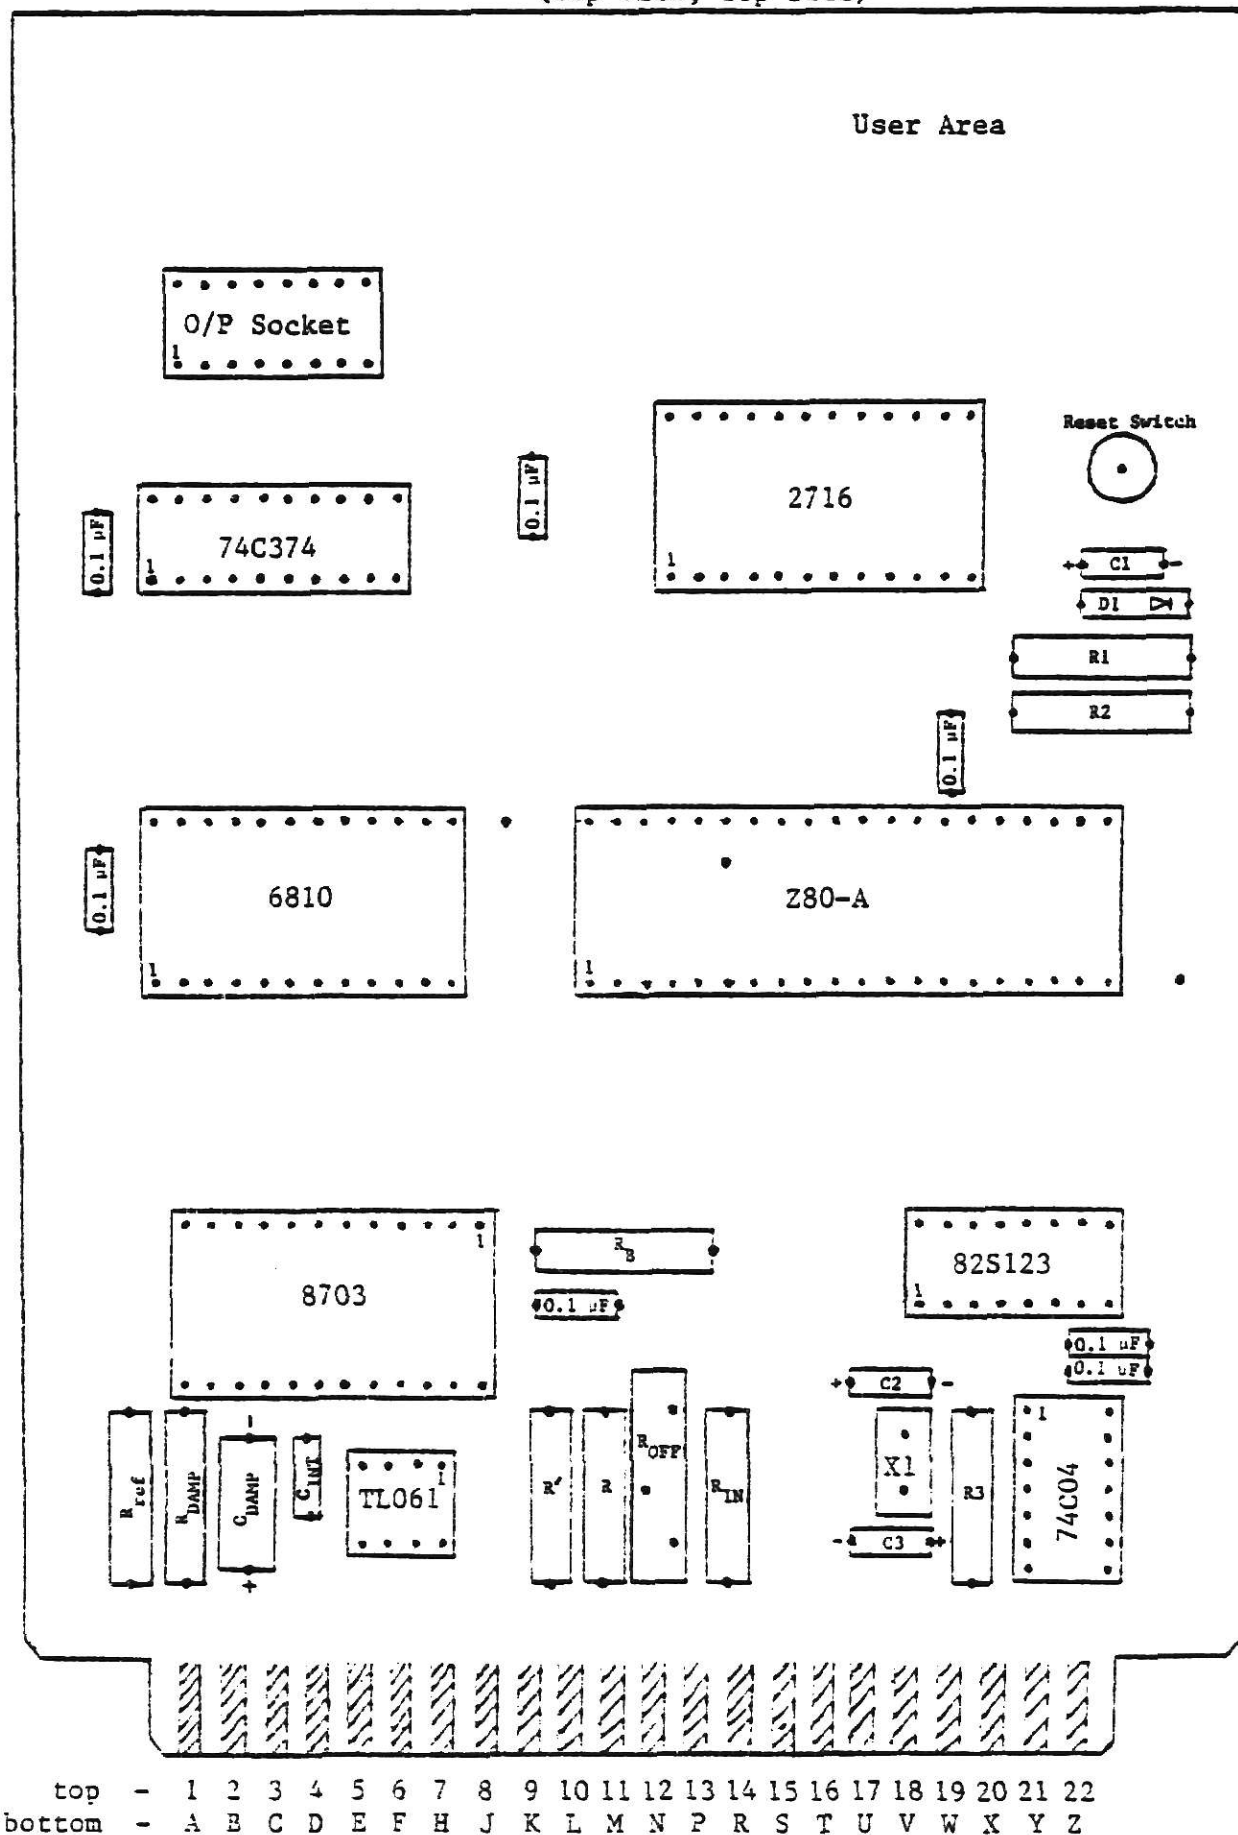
Printed Circuit Board Artwork (Top View, Top Side)
